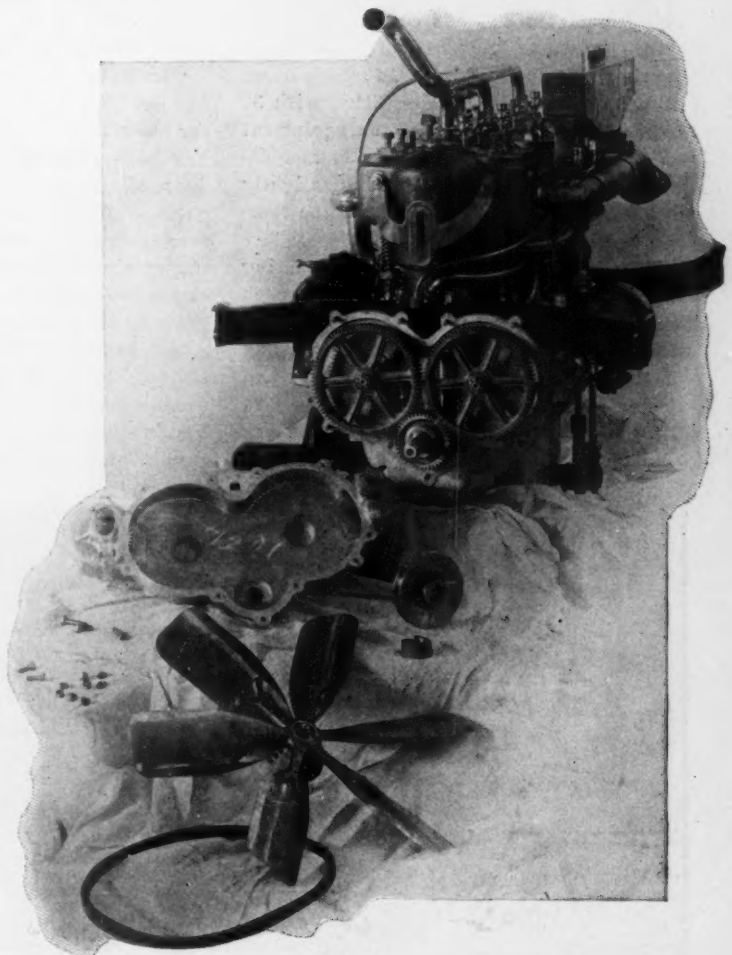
PIERCE FAN SUPPORT AND TIMING GEARS
